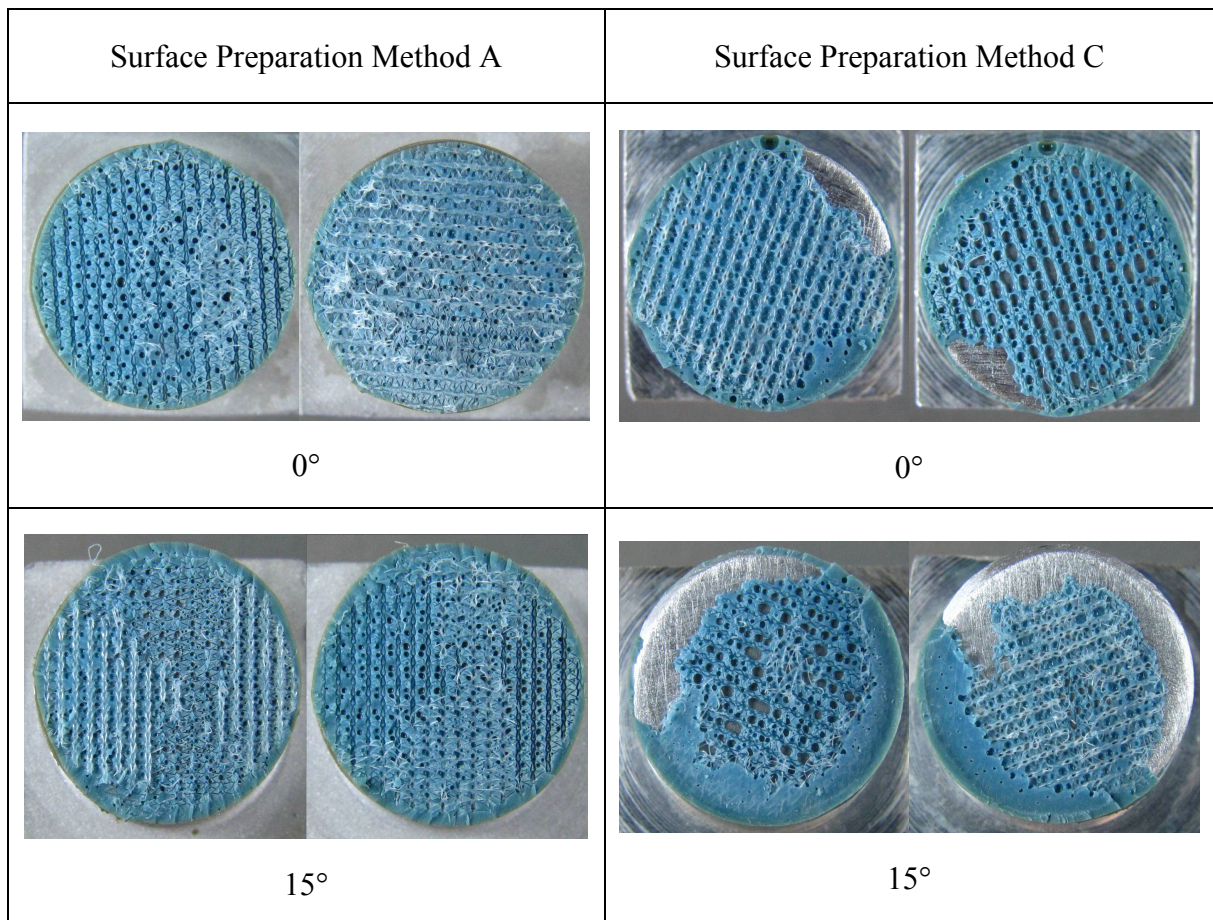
Typical fracture surfaces of the conditioned 0° and 15° scarf joints
